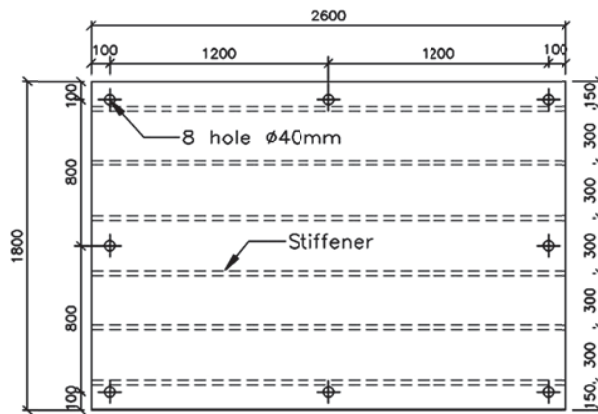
Construction detail drawing of the hardwood timber base plate
